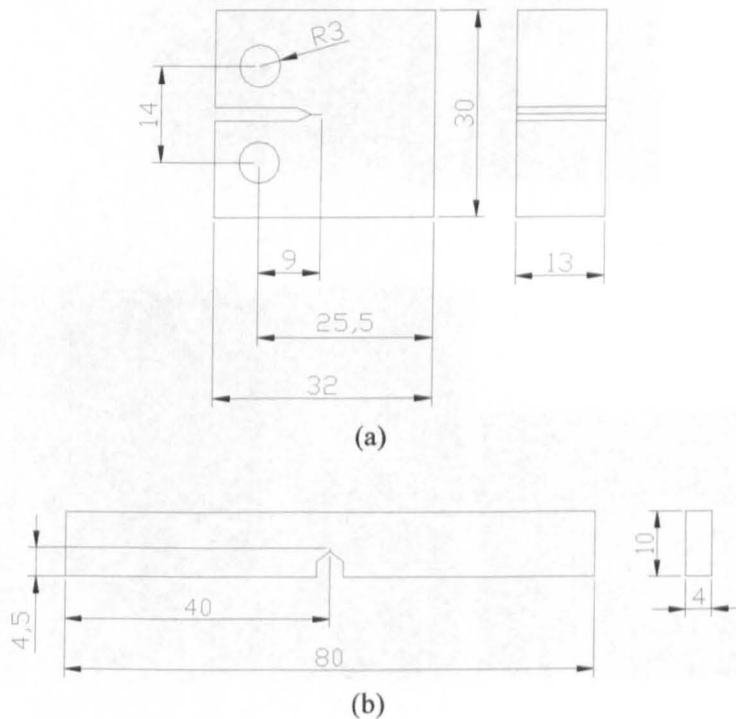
Dimensions of (a) compact tension test specimen for fracture toughness test of Epikote 828 resin systems and (b) single-edge-notch bending specimen (three-point-bending) for fracture toughness test of Cycom 977-20 resin systems.
